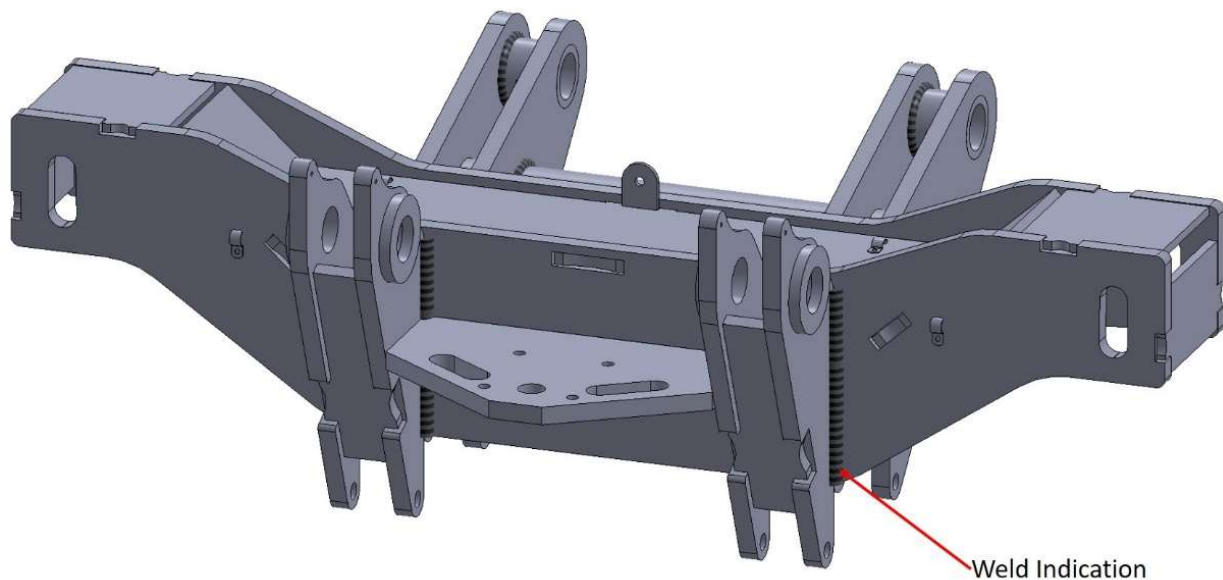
Outer Structure Weldment Gradall XL-3300
